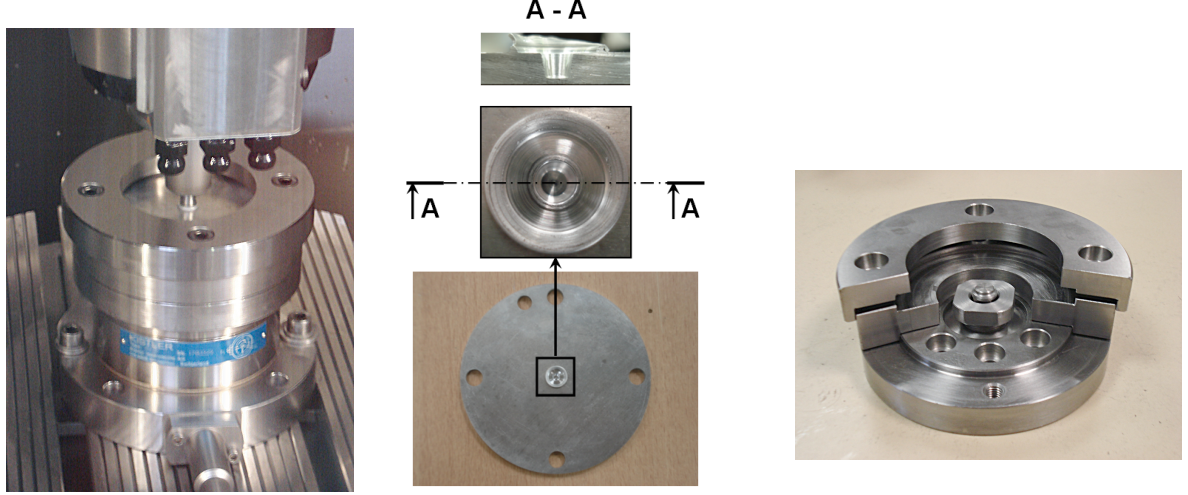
FSSW experiments, cut of the weld, and cut of a setup.
